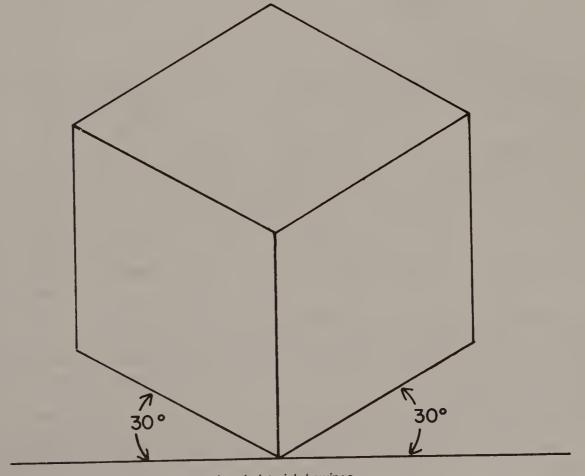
Isometric projection is the most popular of pictorial drawings.
